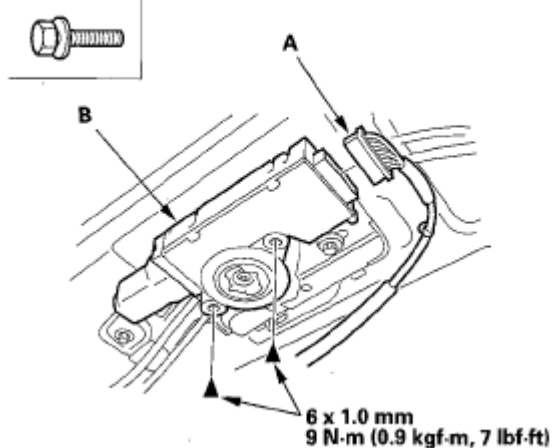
Identifying Connector, Motor And Bolts With Torque Specifications
